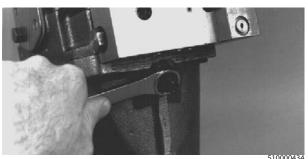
Loosen Minimum Displacement Limiter Lock Nut
